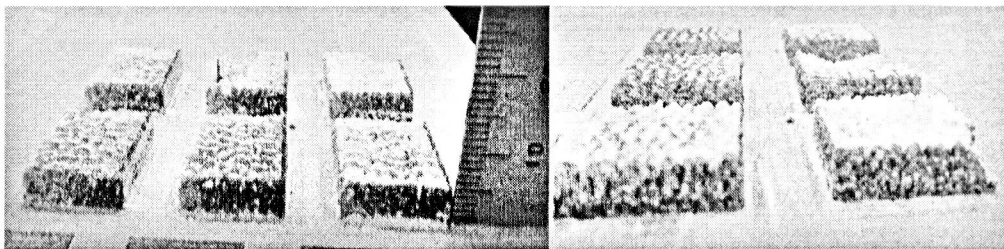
Fabricated alumina-zirconia 3D parts using laser 2
